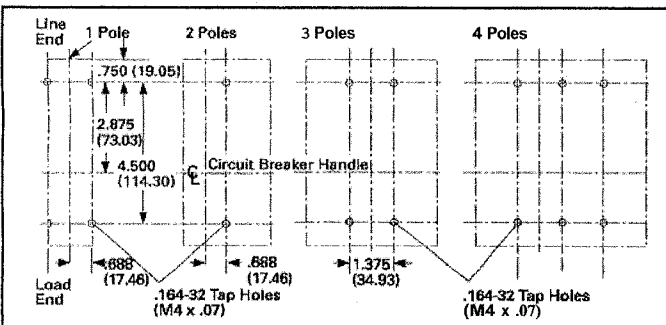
Circuit Breaker Mounting Bolt Drilling Plans
